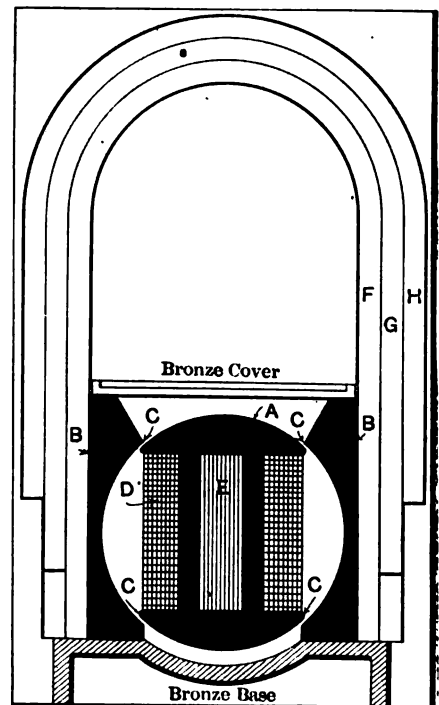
Type of magneto using a bobbin wire-wound armature, soft polar horns to which the permanent magnets are bolted with the condenser within the armature
